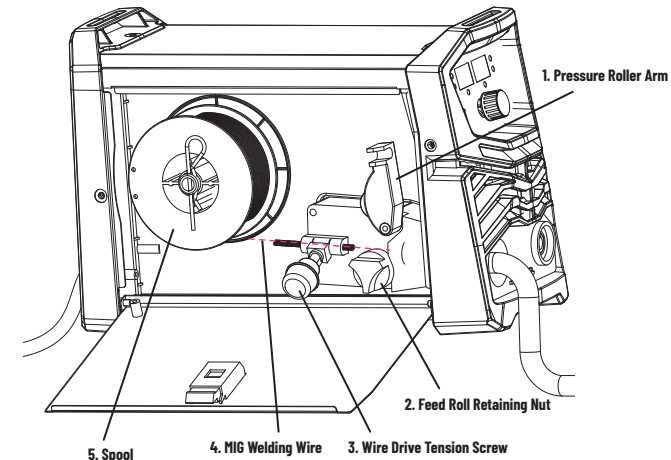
Inserting Wire into the Wire Feed Mechanism
